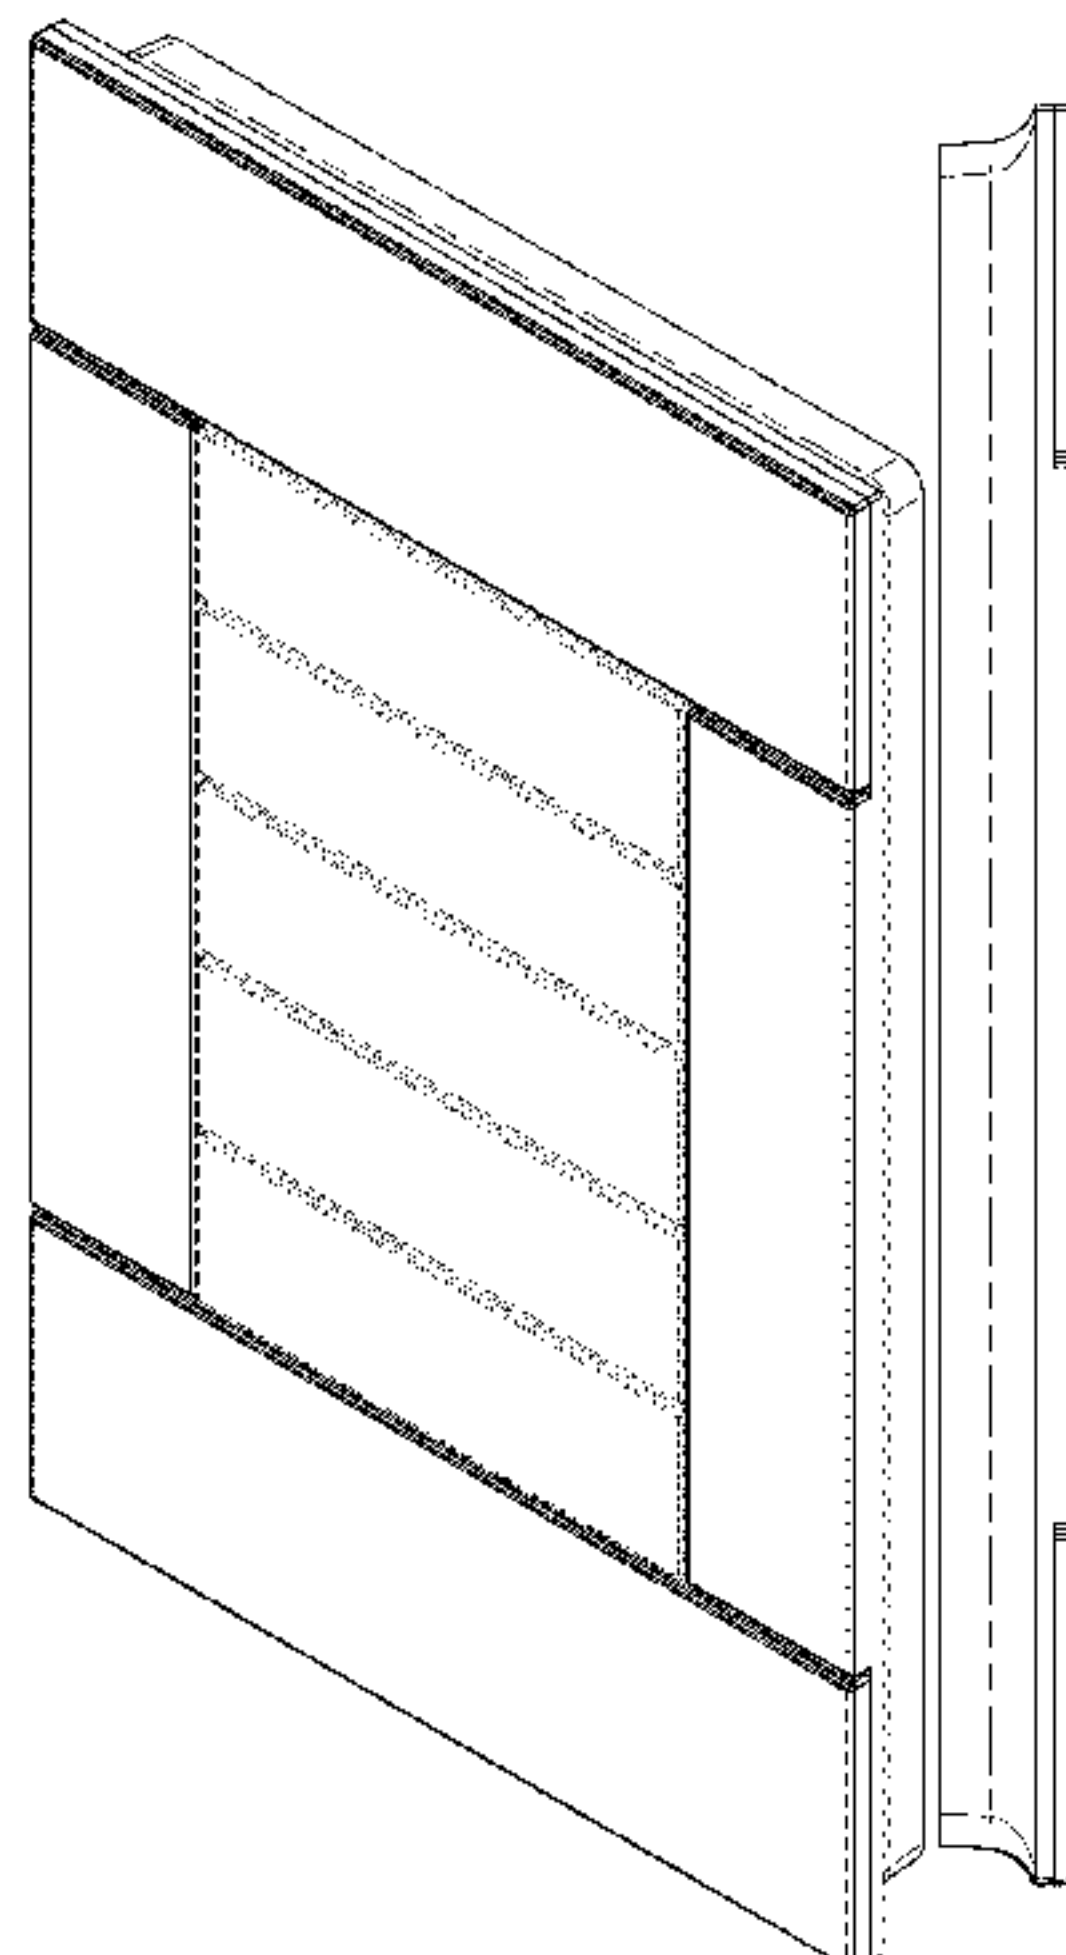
shows a right side view of the faceplate for a wall mounted electrical device.
